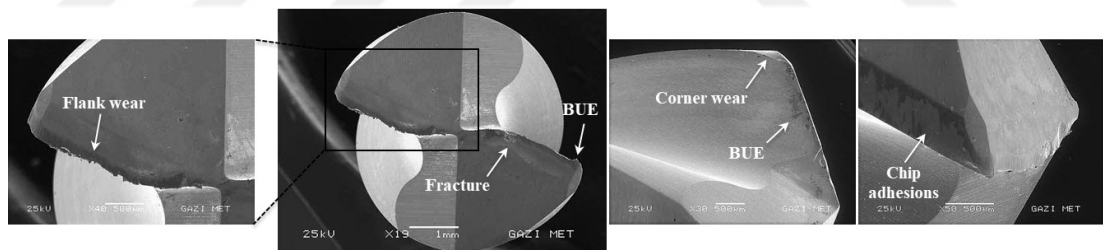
Tool wear types on TiAlN coated twist drill after three holes at 15 m/min under wet conditions.
